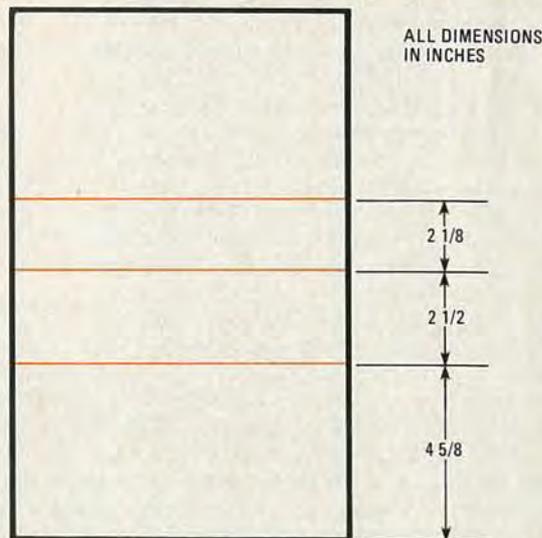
INSIDE OF FRONT, BACK, AND SIDES should be marked as shown. Pieces should also be marked to indicate function ("FRONT," "L. SIDE," etc.).
